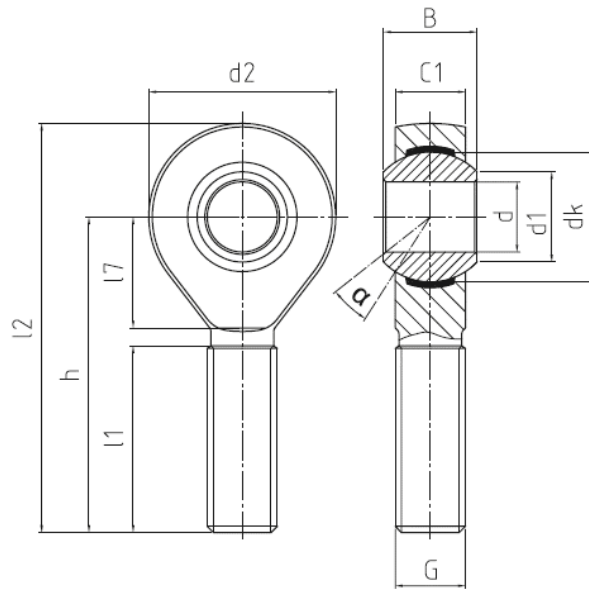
Schematic drawing for Heavy duty Spherical bearing rod end Male
